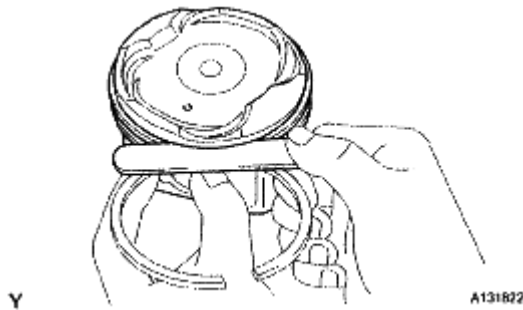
Measuring Clearance Between Piston Ring And Wall Of Ring Groove
